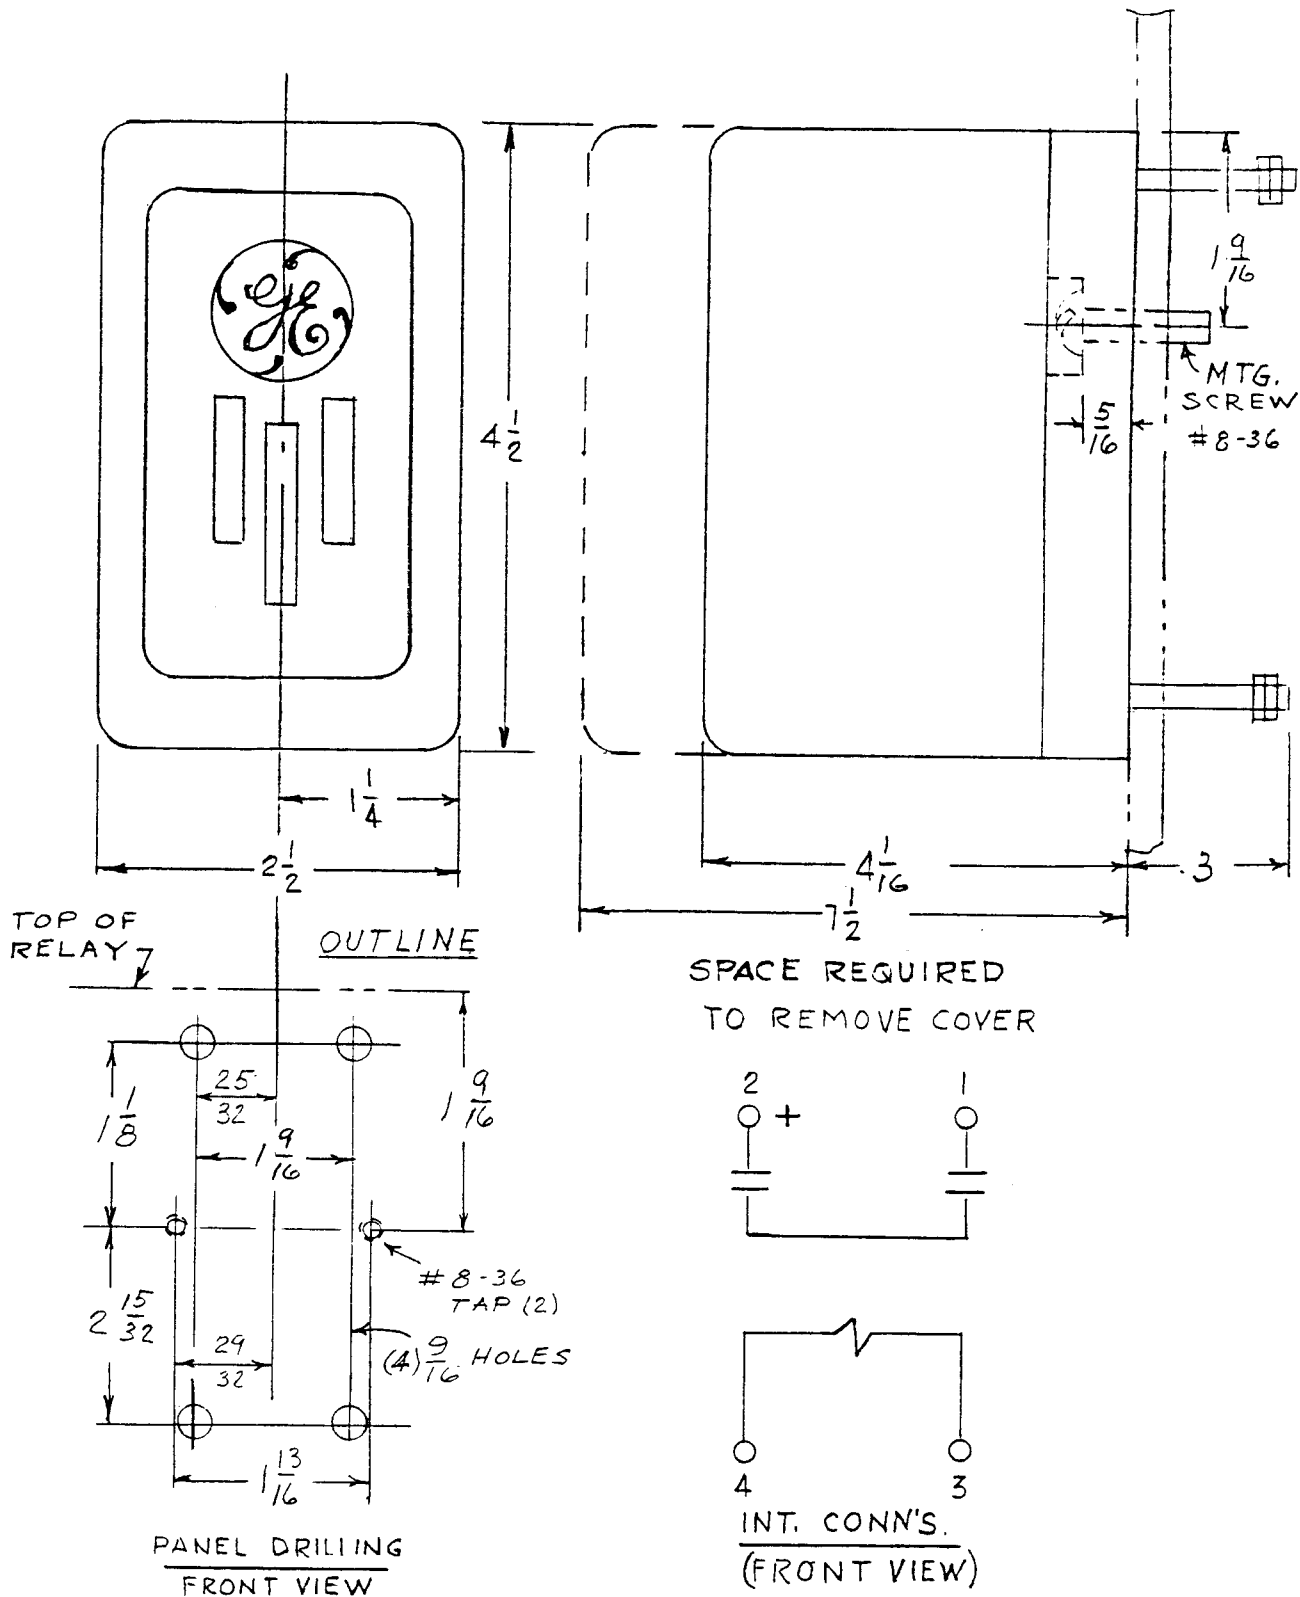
(0178A7177-2) Outline, Panel Drilling Dimensions and Internal Connection Diagram for Relay Type HGA33B.
